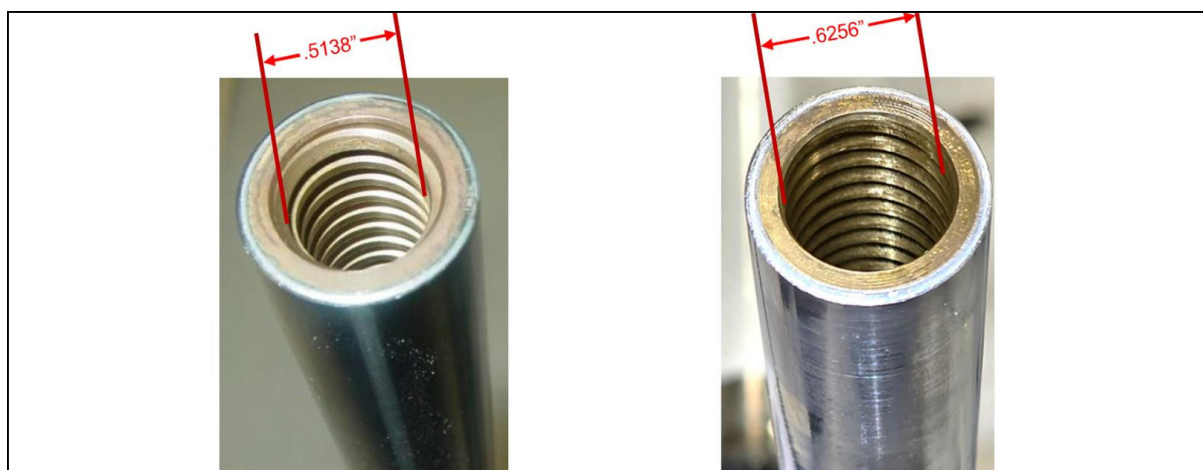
L to R: Threaded portion of the New Nut Assembly Compared to the Subject Nut Assembly.
